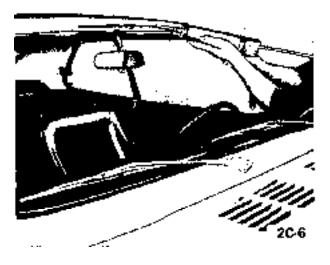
C-6 Applying Sealer on Pinchweld Flange
